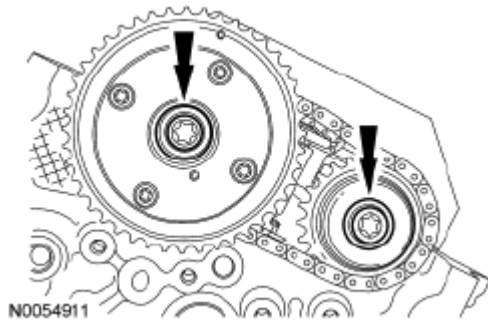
Locating VCT Bolt & Exhaust Camshaft Bolt
